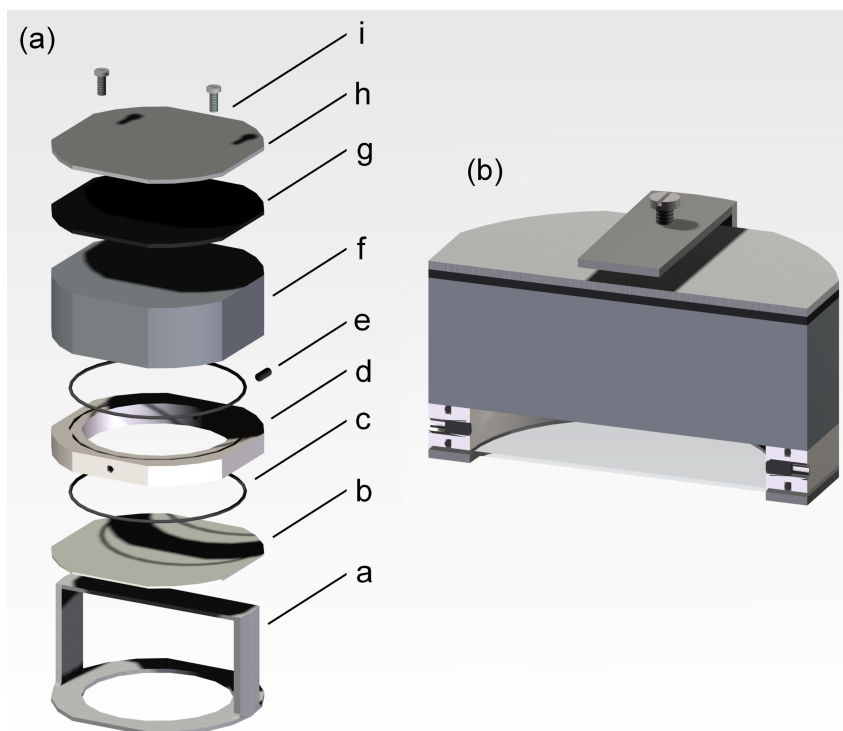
(a) Exploded view and (b) cross section view of the inner sample cell showing the clamp a holding all components of the inner cell in position, the elastic polymer film b, the O-ring c, the Teflon sample holder ring d, the sample container closure screw e, the silicon wafer f, the rubber pad g, the steel cover plate h, and screws i.
